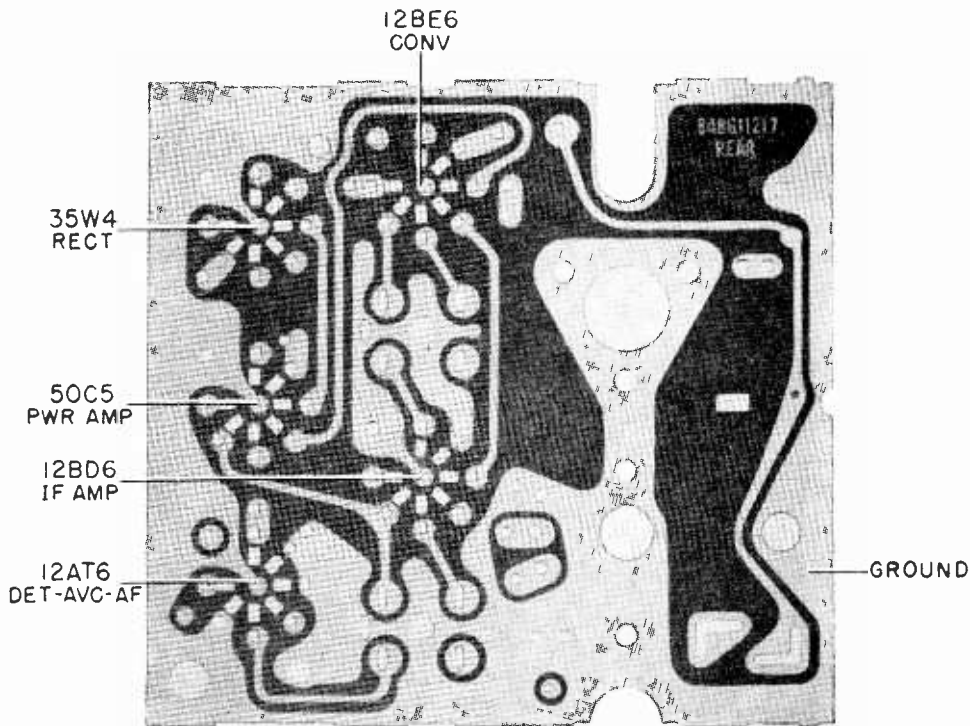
A. A rear view of the blank Motorola plated-circuit chassis HS-289.
